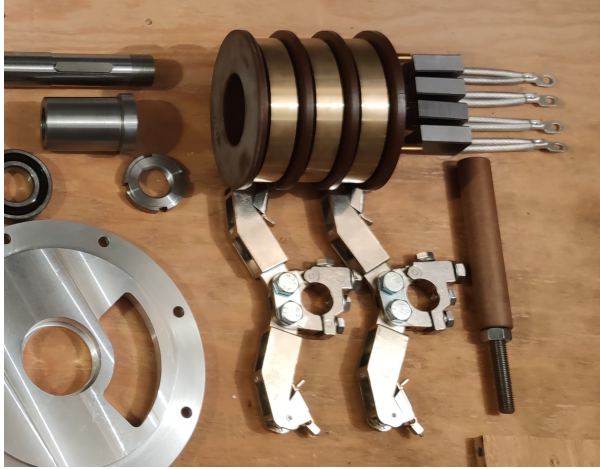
Photo of the parts for the sliprings before installation. To the top left the socket for the sliprings and the clip nut is seen. In the top center is the slip ring frame, and in the bottom center are the two brush holders. To the top right are the four silver graphite brushes and to the bottom right is the socket for the brush holders.
